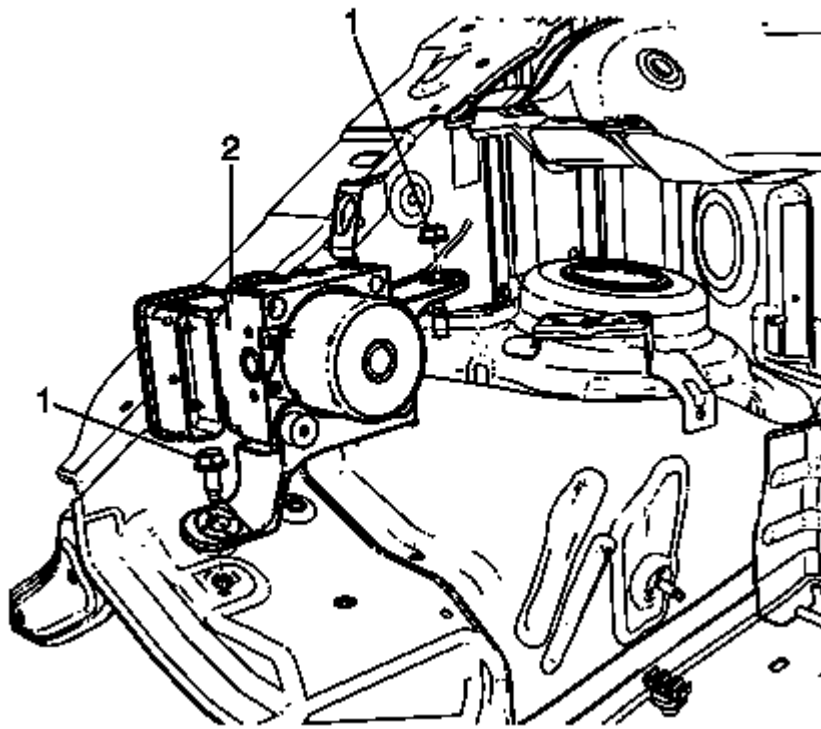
EBCM/BPMV Bracket Bolt/Nut
